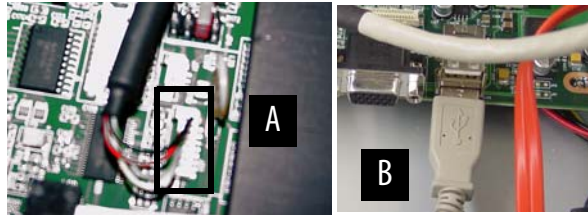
Keyboard cables—A: custom USB cable; B: standard USB cable
